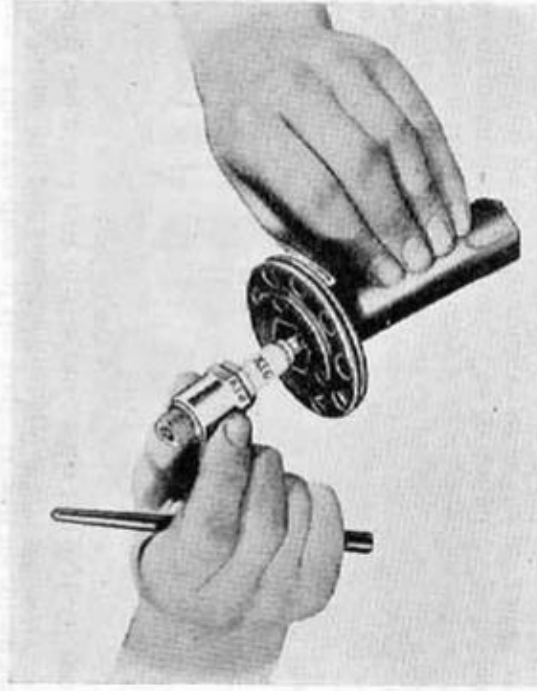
USING K.L.G. TOOL TO DISMANTLE PLUG
